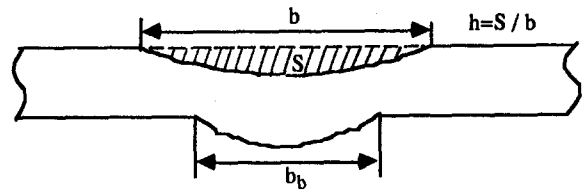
Full penetration weld parameters. This is a cross section of a full penetration weld. S is the cross section area of the depression, b is the top-side weld width. The weld depression h is defined as the ratio $h = S/b$. It can be seen that h is actually the average weld depression of the cross section.
